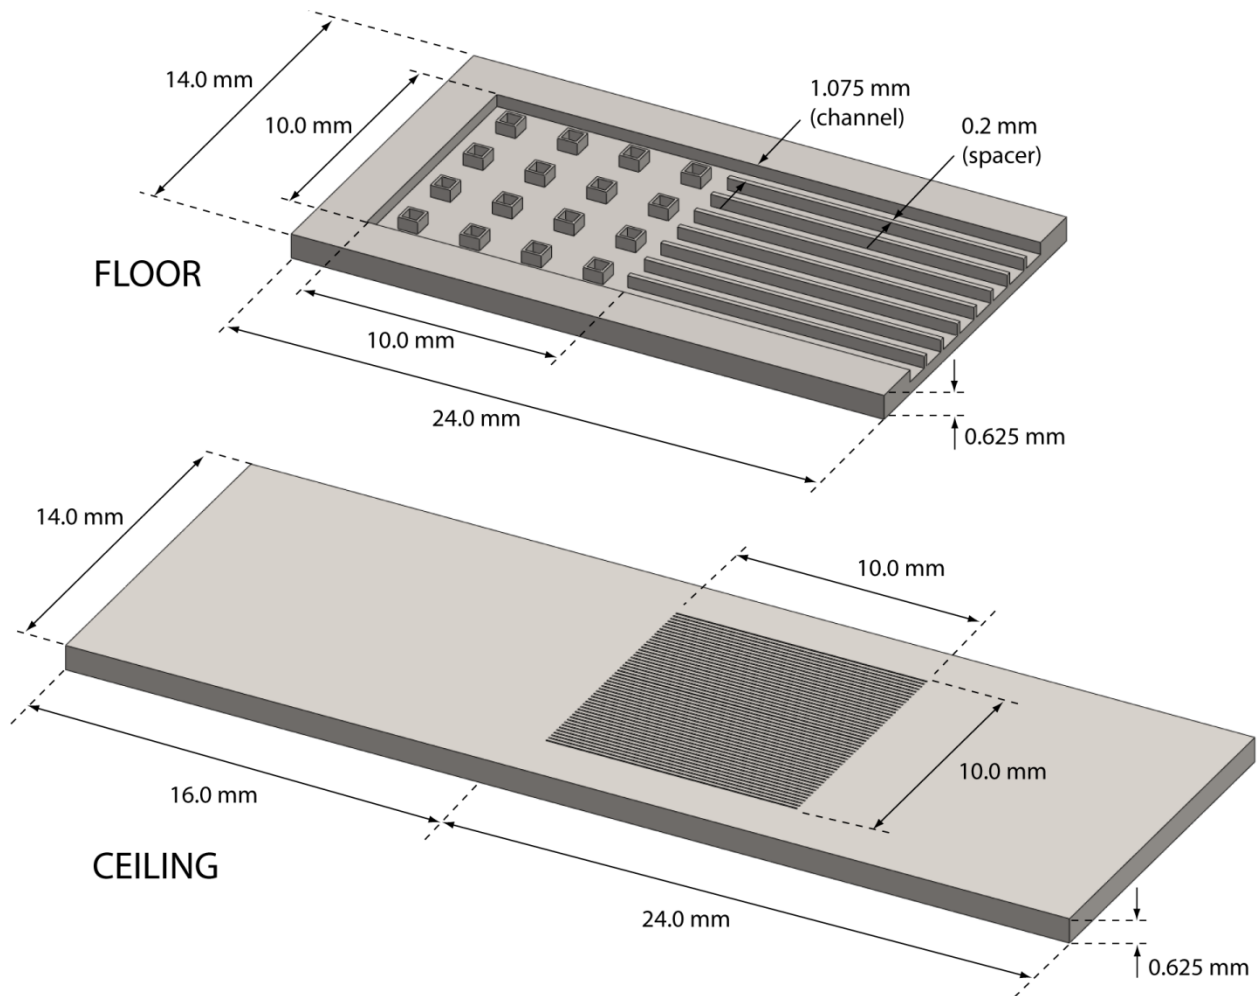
Fully dimensioned drawings of floor and ceiling components.
